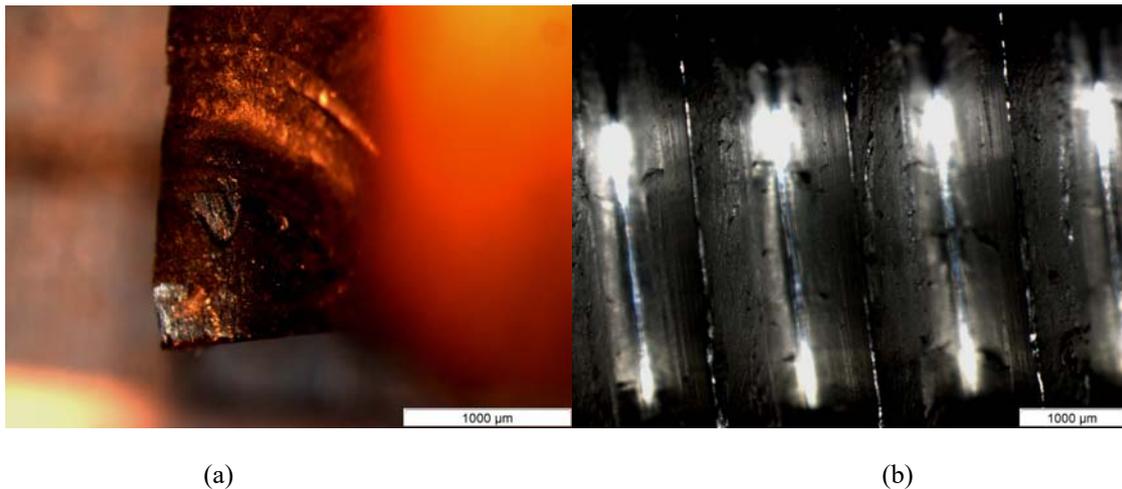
Incremental infeed results (a), worn tool, (b) thread surface finish.
